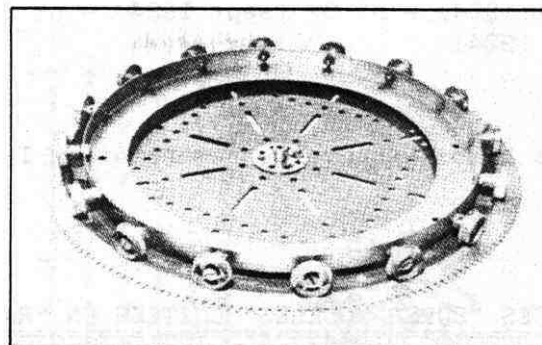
The Geared Roller Bearing with the upper toothed race removed to show a Bush Wheel centring device.
